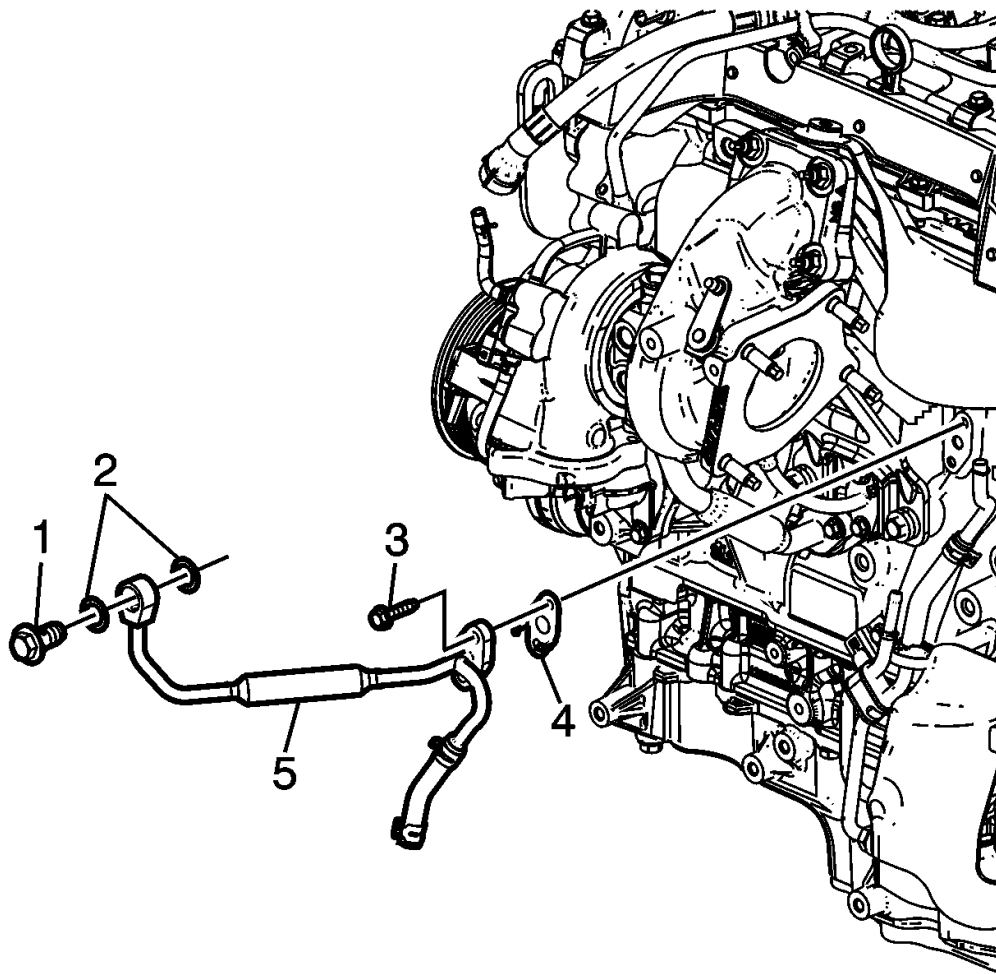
Turbocharger Coolant Feed Pipe Bolts
